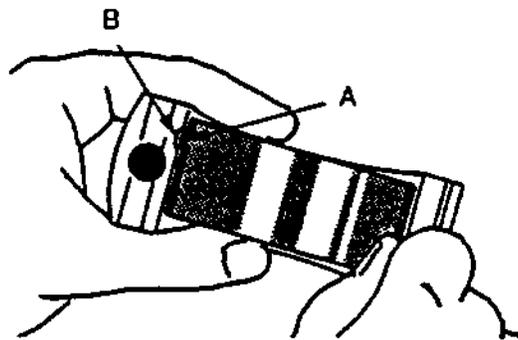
Installing Connecting Rod Cap Bearing
